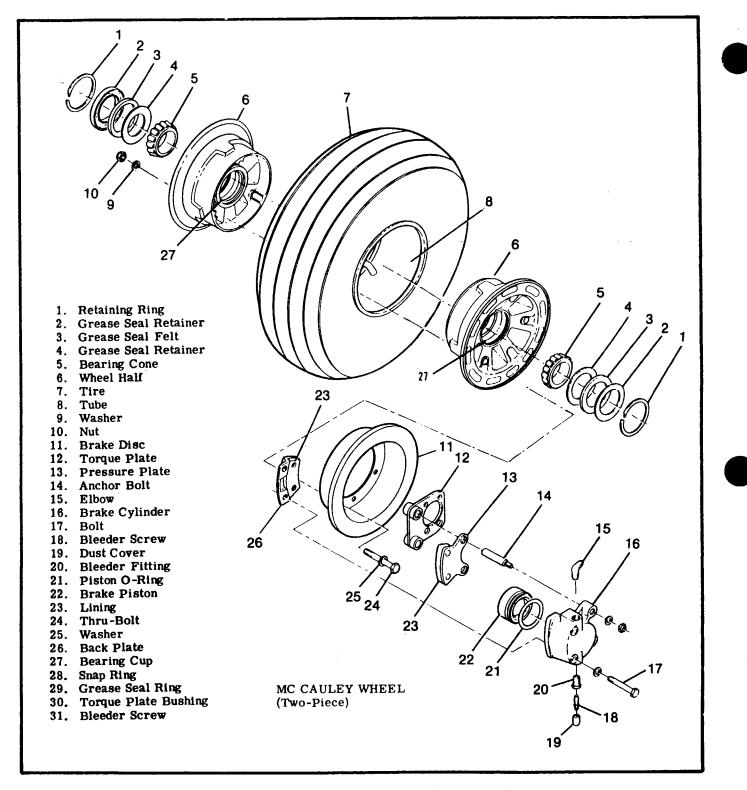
Main Wheel and Brake (Sheet 1 of 3)
